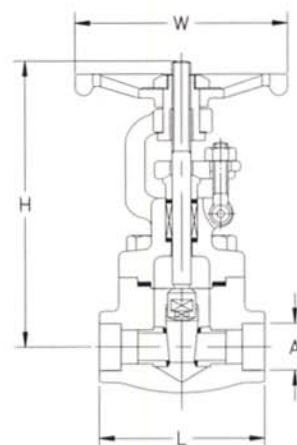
S-FS2 Class 800 (Socket Weld)
